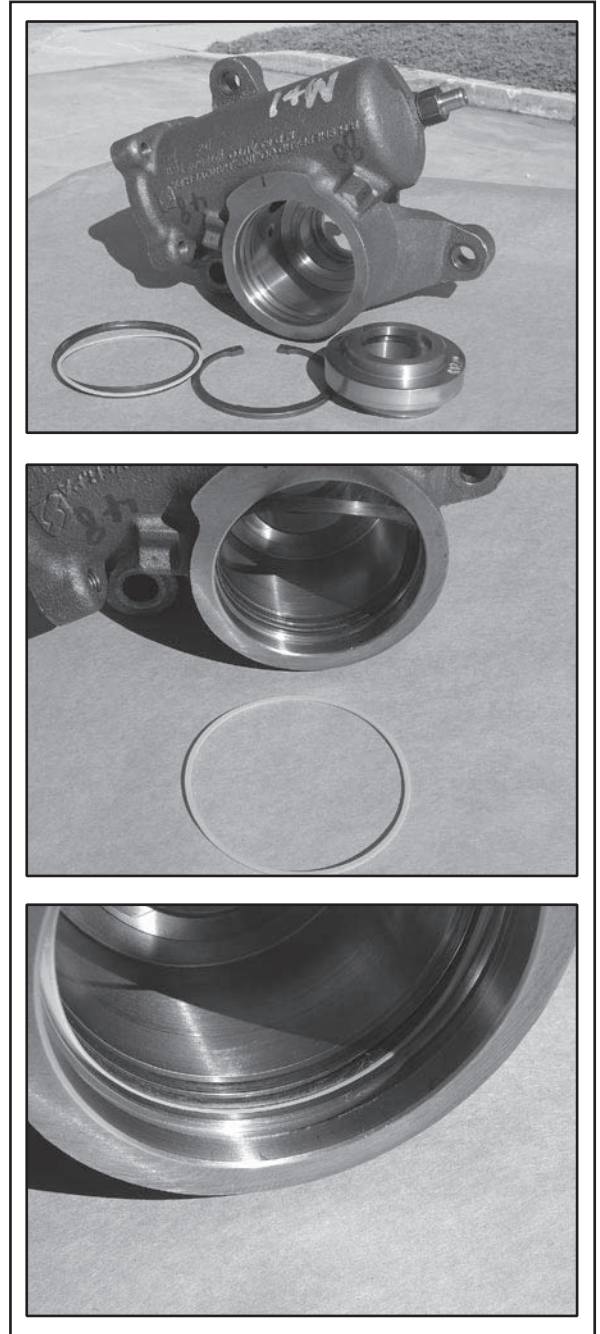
MD83 Showing Housing, L-Seal, New Cover, and Backup Ring.
